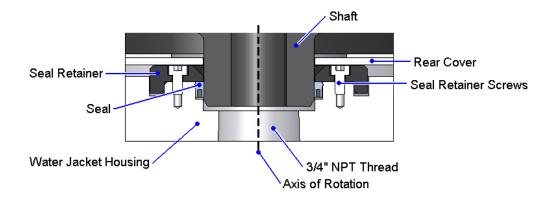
Cross-section View of Water Jacket Seal Showing Seal Orientation
